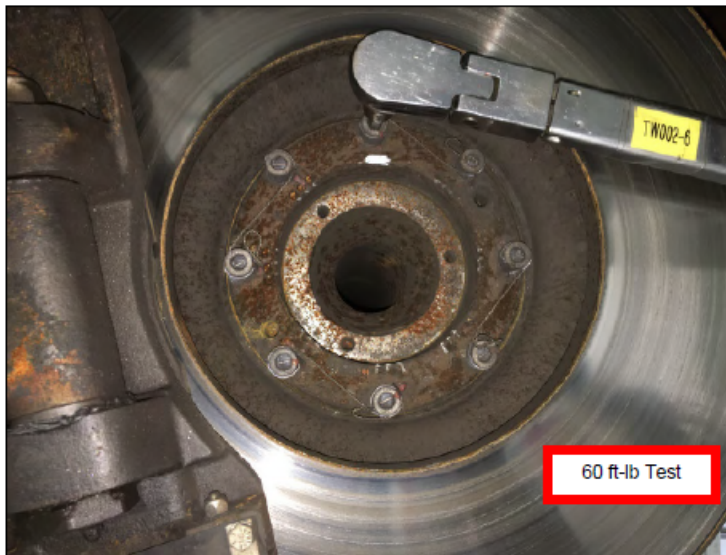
Torque wrench set-up with white mark under the highest bolt, which marks it as the first bolt to be checked, then progress in a clockwise direction.
